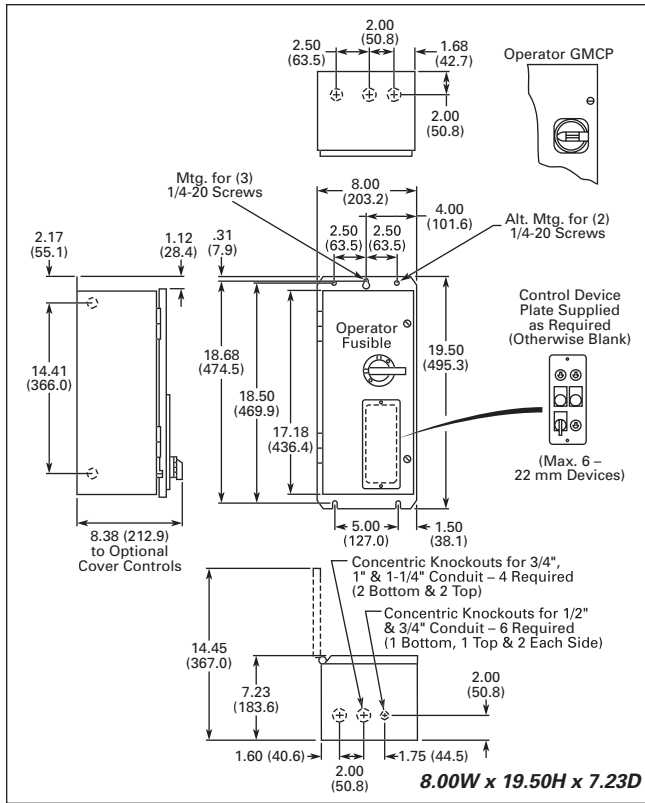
Box K ② — Approximate Dimensions in Inches (mm)
